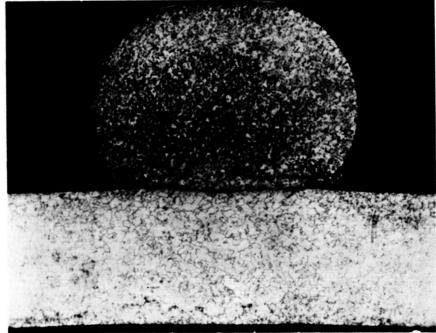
Weld joint 1.3. JPL 2; gold plated Kovar wire to Inco ribbon; sterilized; 150x magnification; Carapella + nitric-acetic etch (02326).
